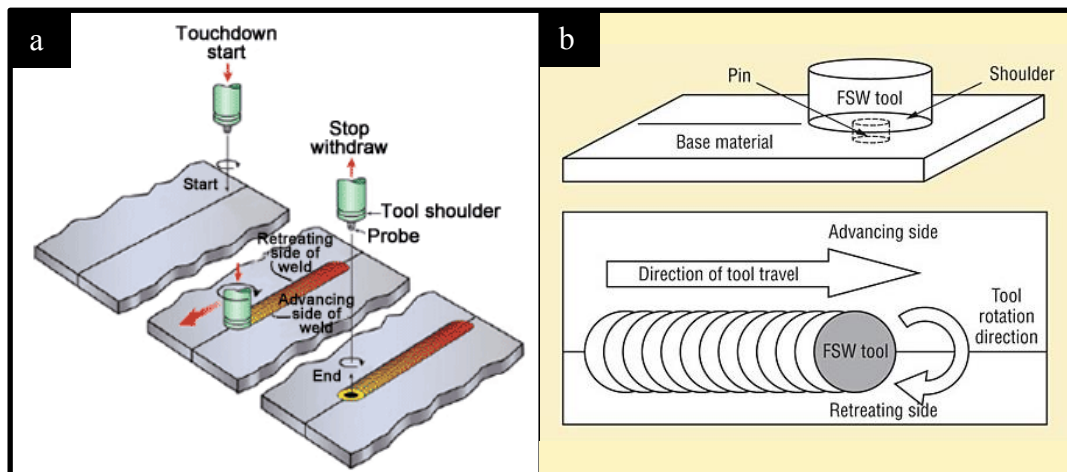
A schematic of a) the FSW process and b) the difference between advancing side and retreating side of the weld.
